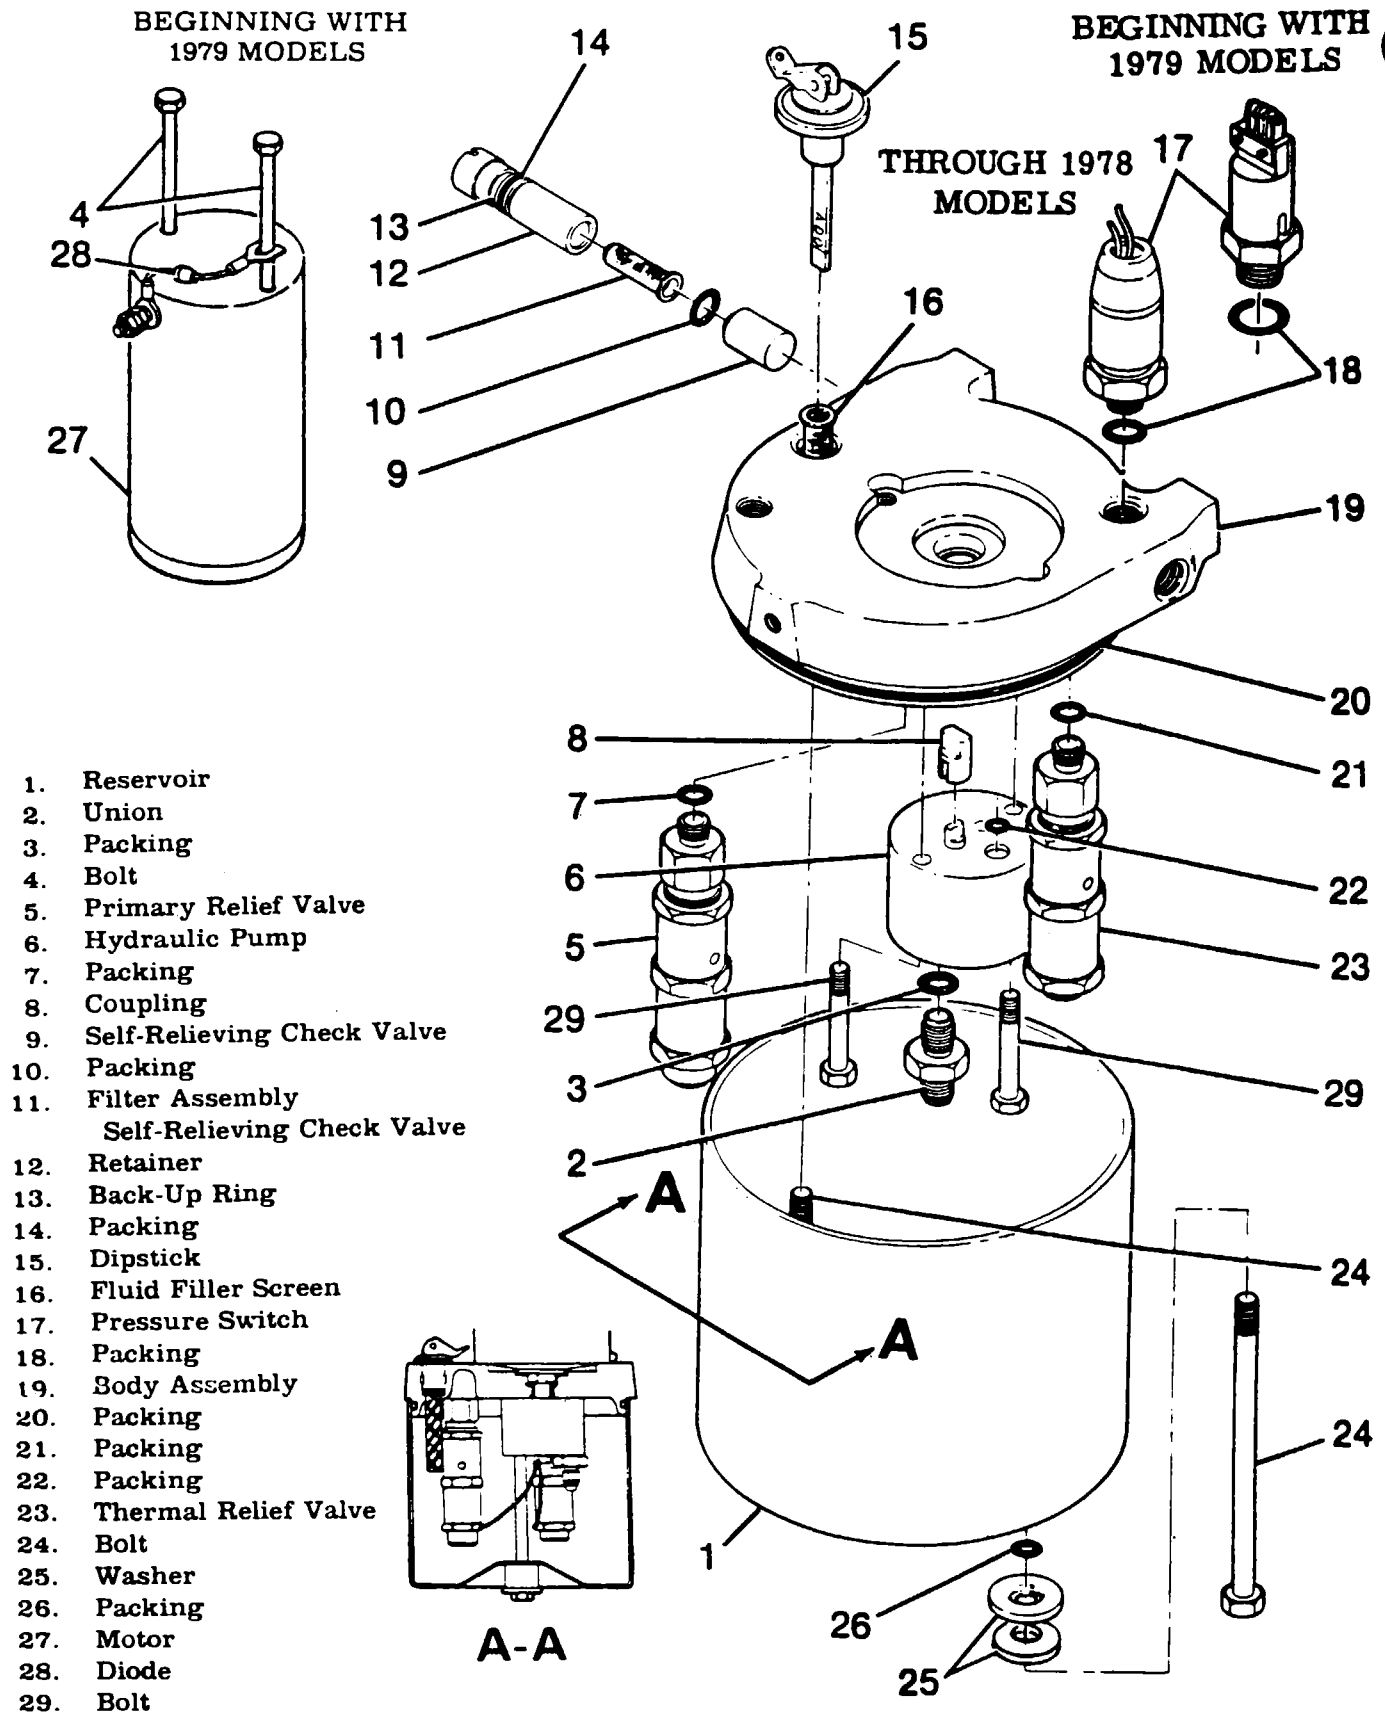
Hydraulic Power Pack Assembly (Sheet 2 of 2)
